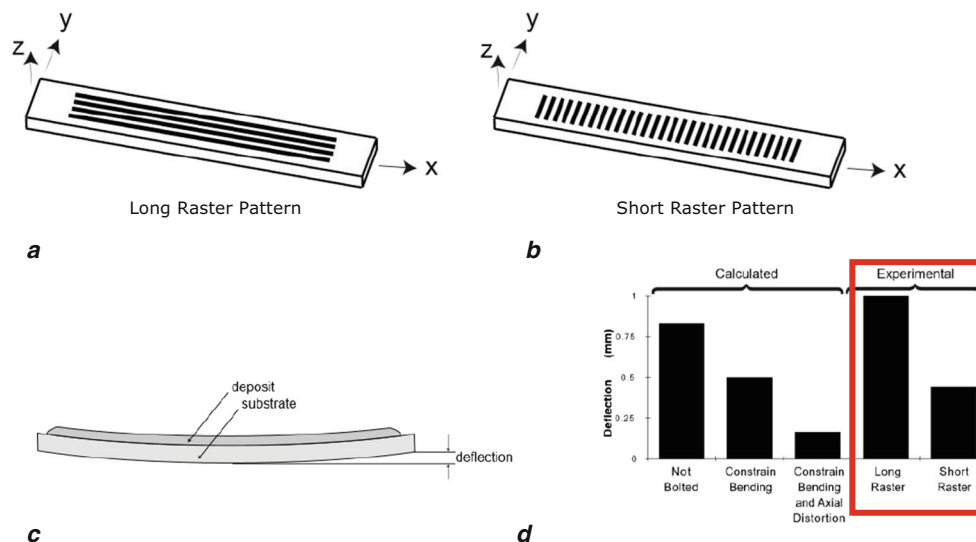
Results of a study of shape deposition depending on welding direction [8]: long raster pattern (a), short raster pattern (b), illustration of deflection (c), exp. deflection of long and short raster pattern (d)
